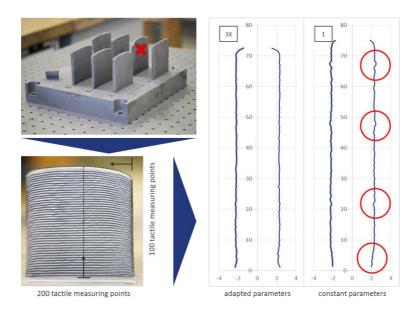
Ti-6Al-4V building platform with LMD manufactured walls and measuring position for the tactile evaluation (left) and resulting cross sections exemplary for wall '1' and '3X' (right).
